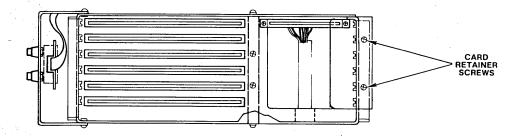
Card Cage Board Clamp Retaining Screw Locations
